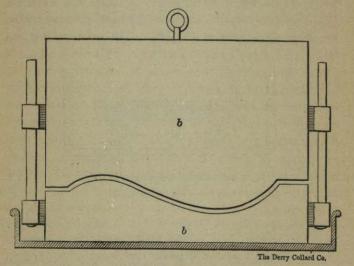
Method for cooling gun spring shown above or other irregular pieces.
